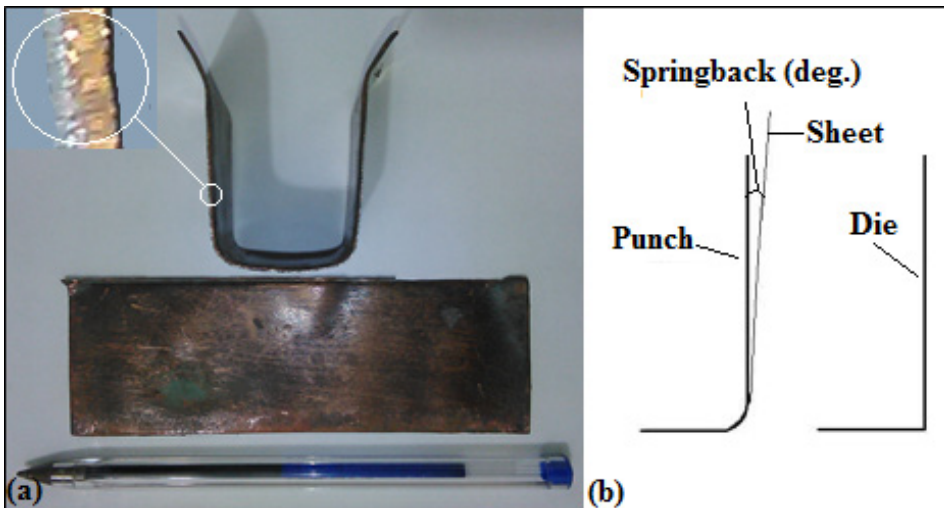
(a) Cu-SS two-layer sheet bonded with explosive welding before and after the bending process; (b) Schematic view of the springback angle in U-shape bending.
